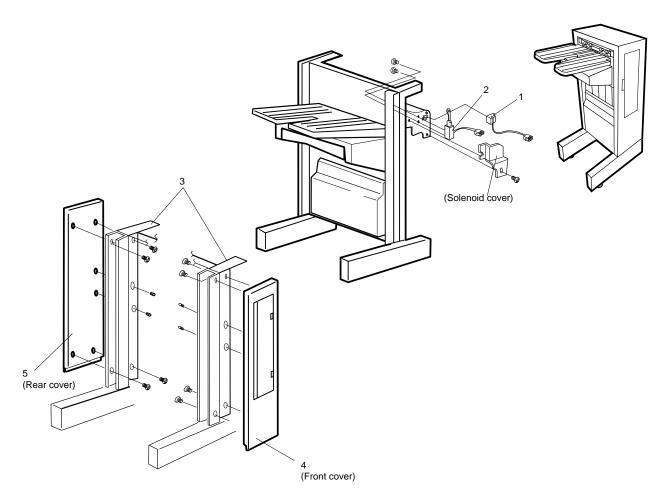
LCOS Controls and Covers Assemblies Parts Locational Diagram
